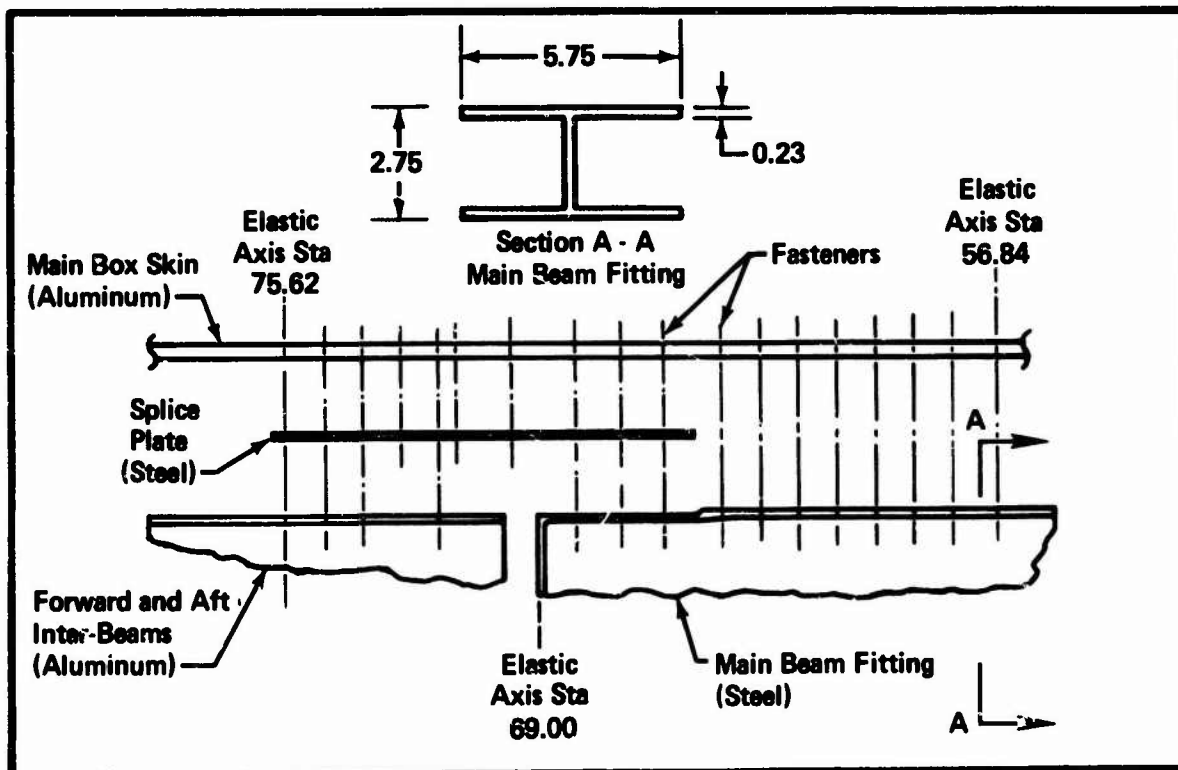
Exploded Side View of Horizontal Stabilizer Inboard Splice Joint
